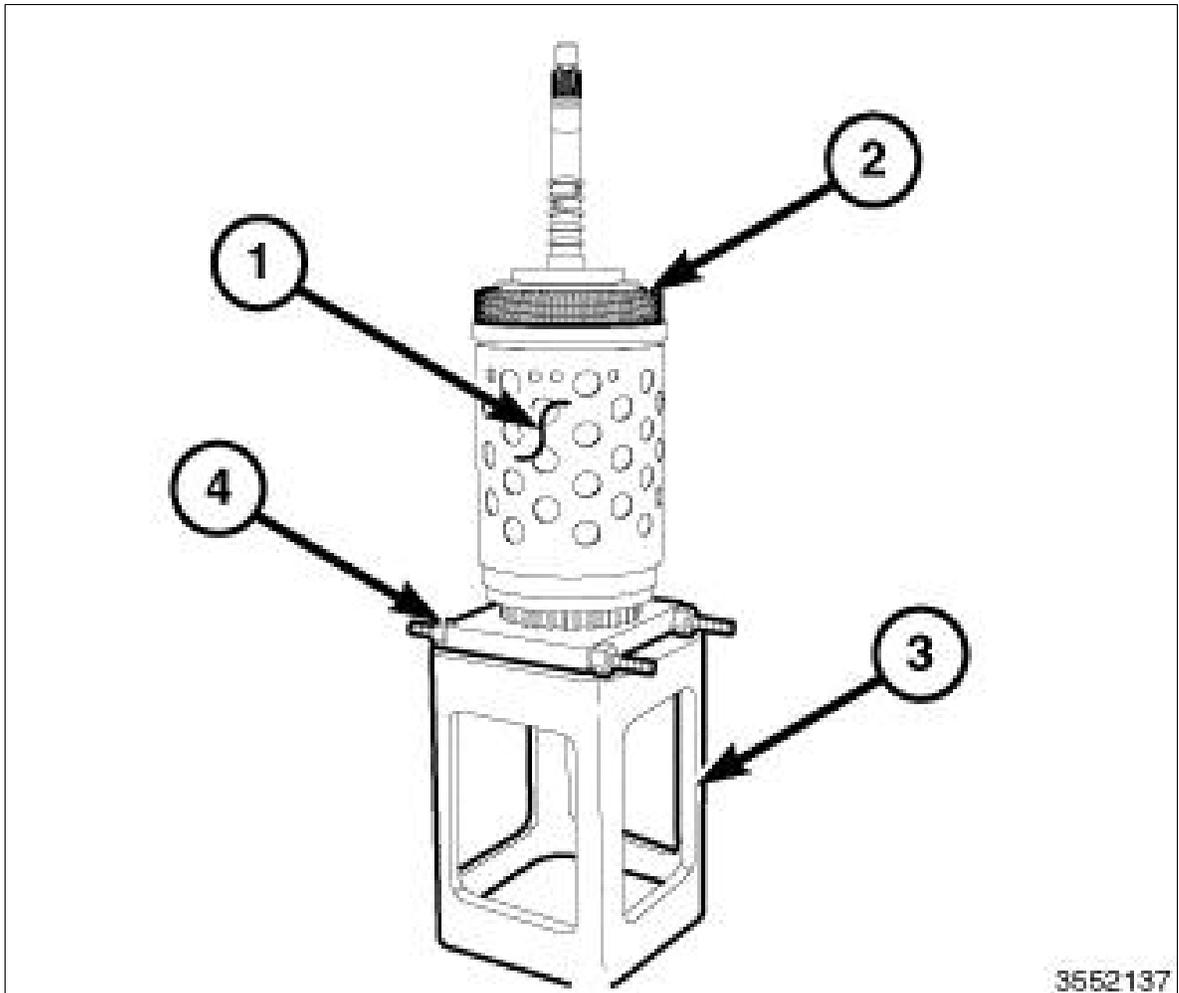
P1 Annulus/B-Clutch Hub Assembly, Needle Bearing And Holding Plate
